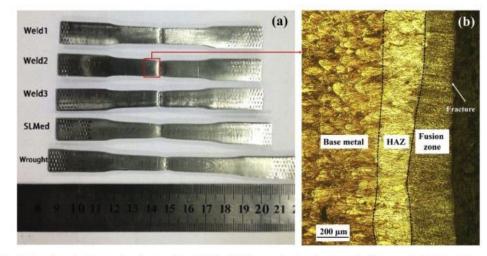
Photos of tensile test samples after tensile tests (a) and OM image showing fracture path of laser-welded joint under type 2 (b).
